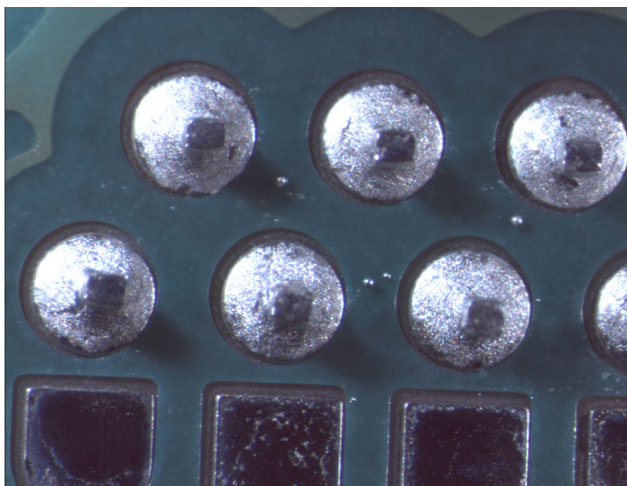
Solder joints of an integrated circuit shown from the below of a printed wiring board
